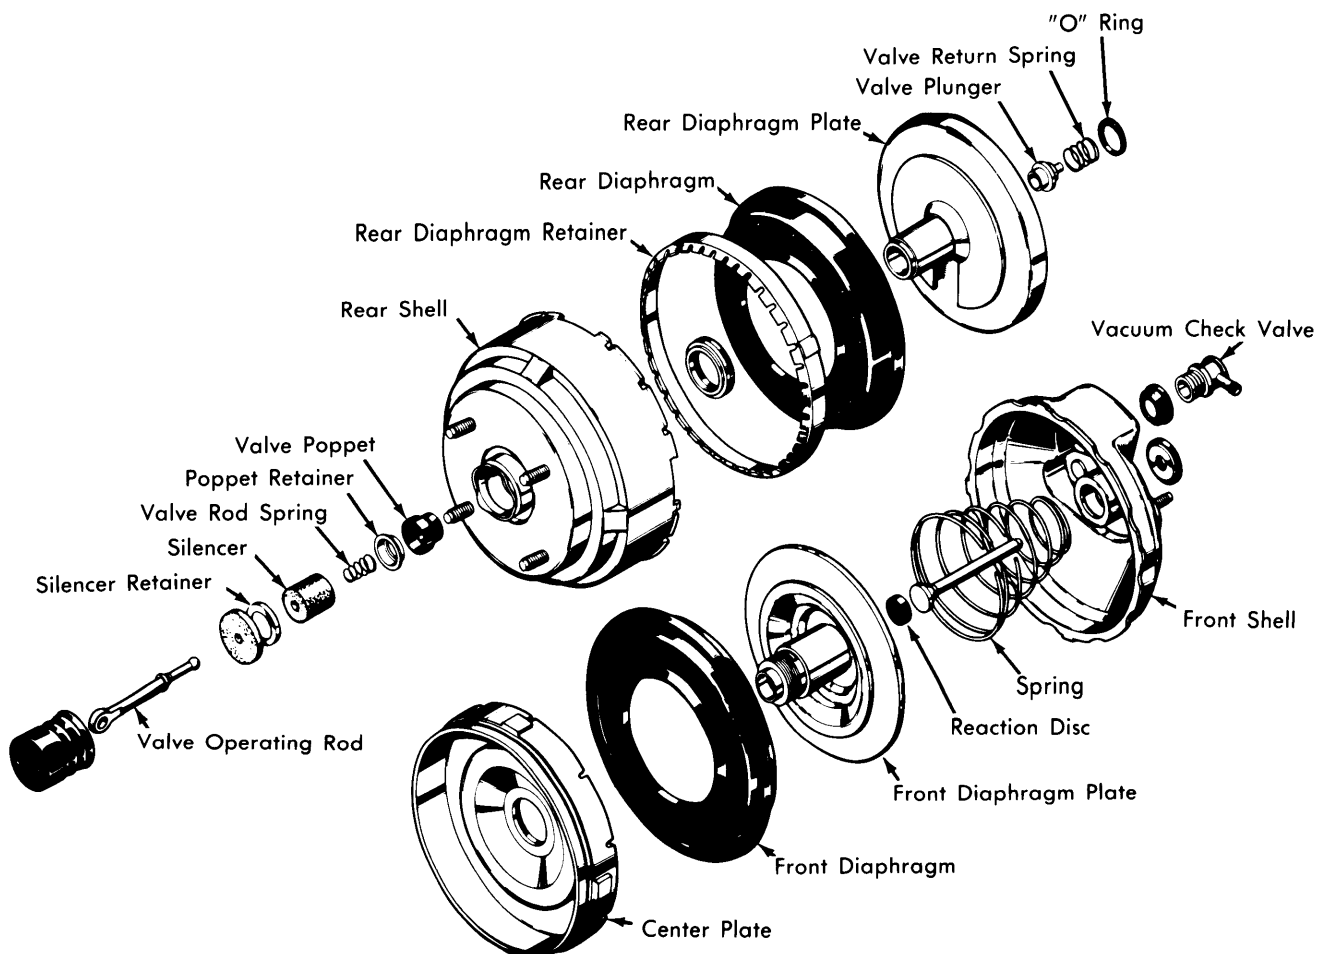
Exploded View of Bendix Tandem Diaphragm Unit
